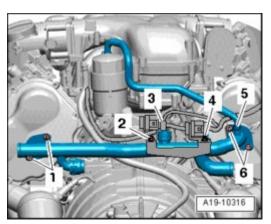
Identifying Nuts, Bolts, Electrical Connector On Engine Coolant Temperature (ECT) Sensor G62 & Coolant Hose
